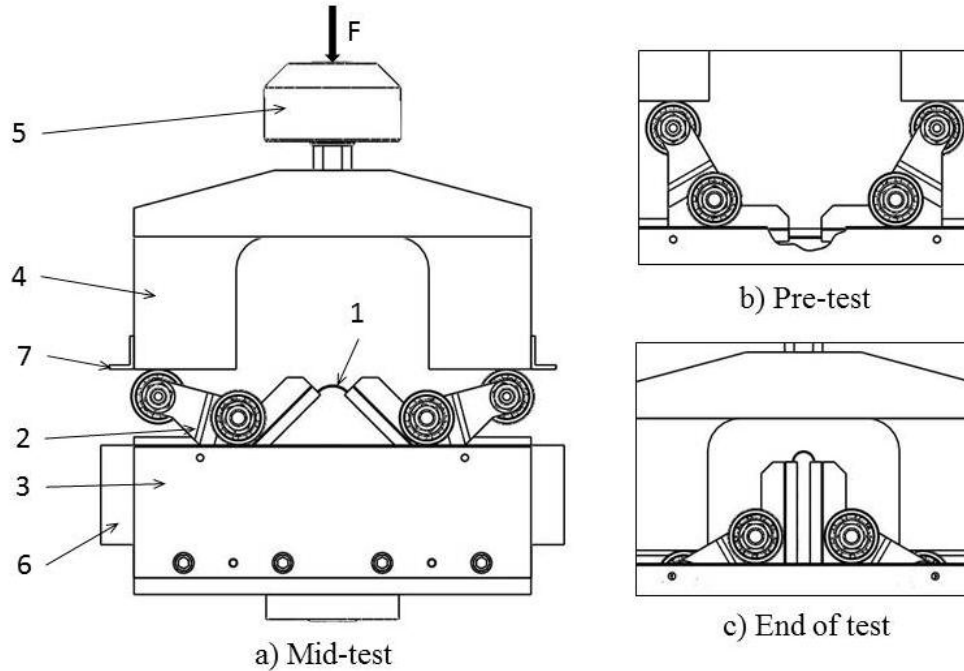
a) Schematic of the improved, pure-moment test fixture during test; 1 – coupon, 2 – carts, 3 – tracks, 4 – crosshead, 5 – force sensor, 6 – laser displacement sensors, 7 – laser displacement sensor target; b) starting position; c) largest specimen deformation: 180° arc
